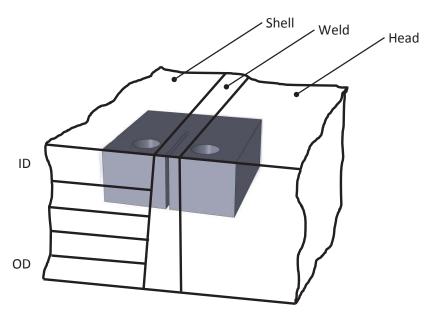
Schematic of Head Weld FCG Specimen Extraction
